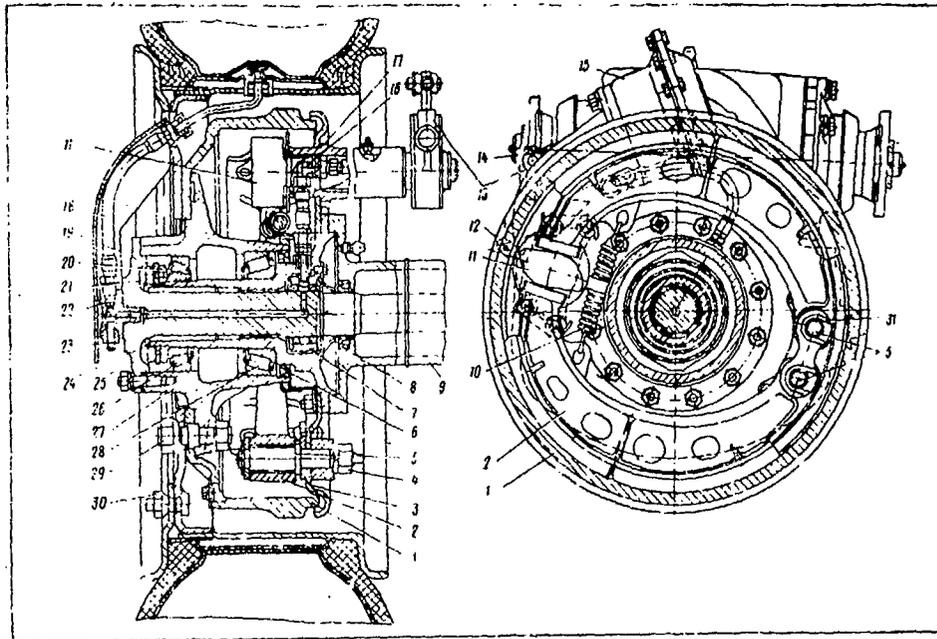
Brake Mechanism of Middle Axle Wheels of ZIL-131: 1, brake drum; 2, brake shoe; 3, brake disc; 4, 29 and 30, nuts; 5, shoe axis; 6 and 8, glands; 7, air feed head; 9, axle case; 10, shoe retracting spring; 11, spreader cam; 12, control lever worm; 13, control lever; 14, shaft; 15, brake cylinder; 16, air supply fitting; 17, spreader cam bracket; 18, air line; 19, lock washer; 20, bearing adjusting nut; 21, counter nut; 22, tire valve; 23, protecting cover; 24, pin; 25, half axle; 26 and 28, bearings; 27, wheel hub; 31, cotter pin
